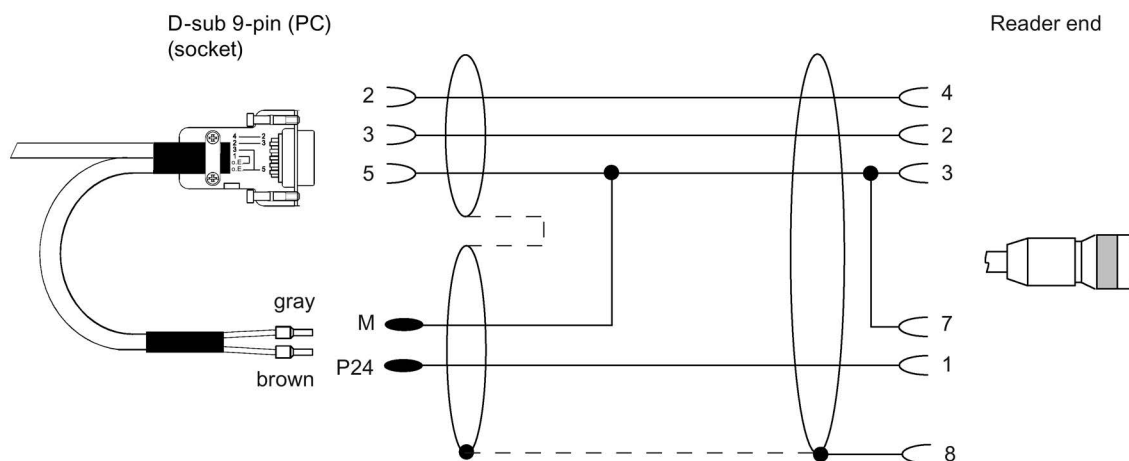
Connecting cable between PC and RF380R (RS-232) with open ends for the power supply
